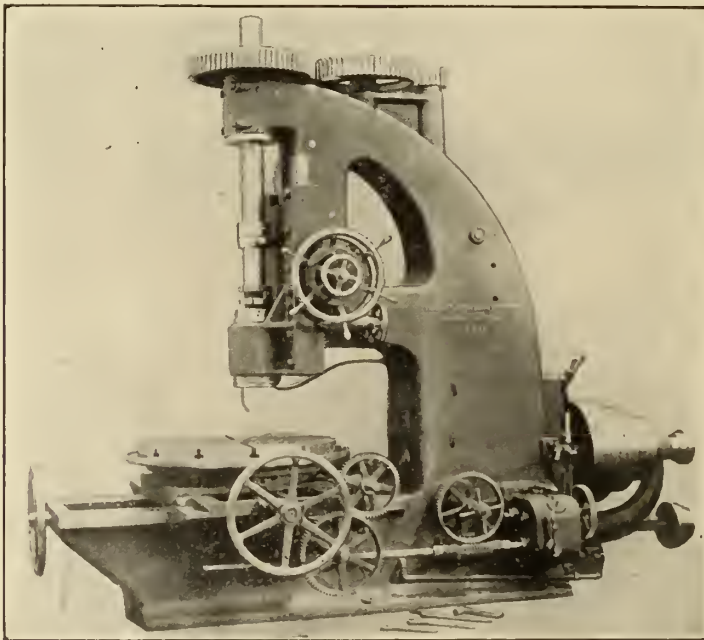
NEW BERTRAM VERTICAL MILLING MACHINE.
